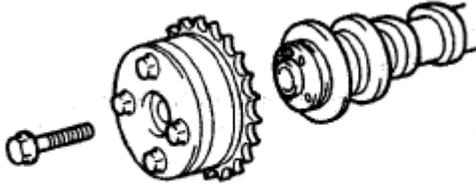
Identifying Fringe Bolt From Camshaft Timing Gear
